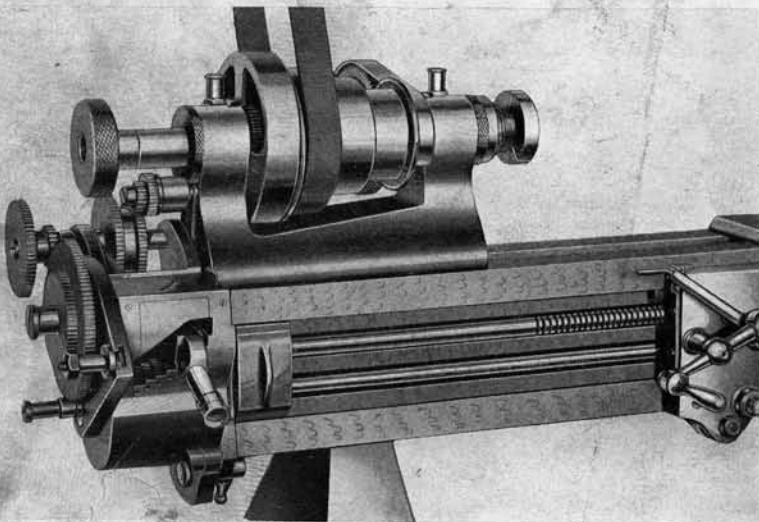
a. Showing quick change gear box, a great convenience when many different threads are cut. May be furnished for lathes already sold with standard change gears.
